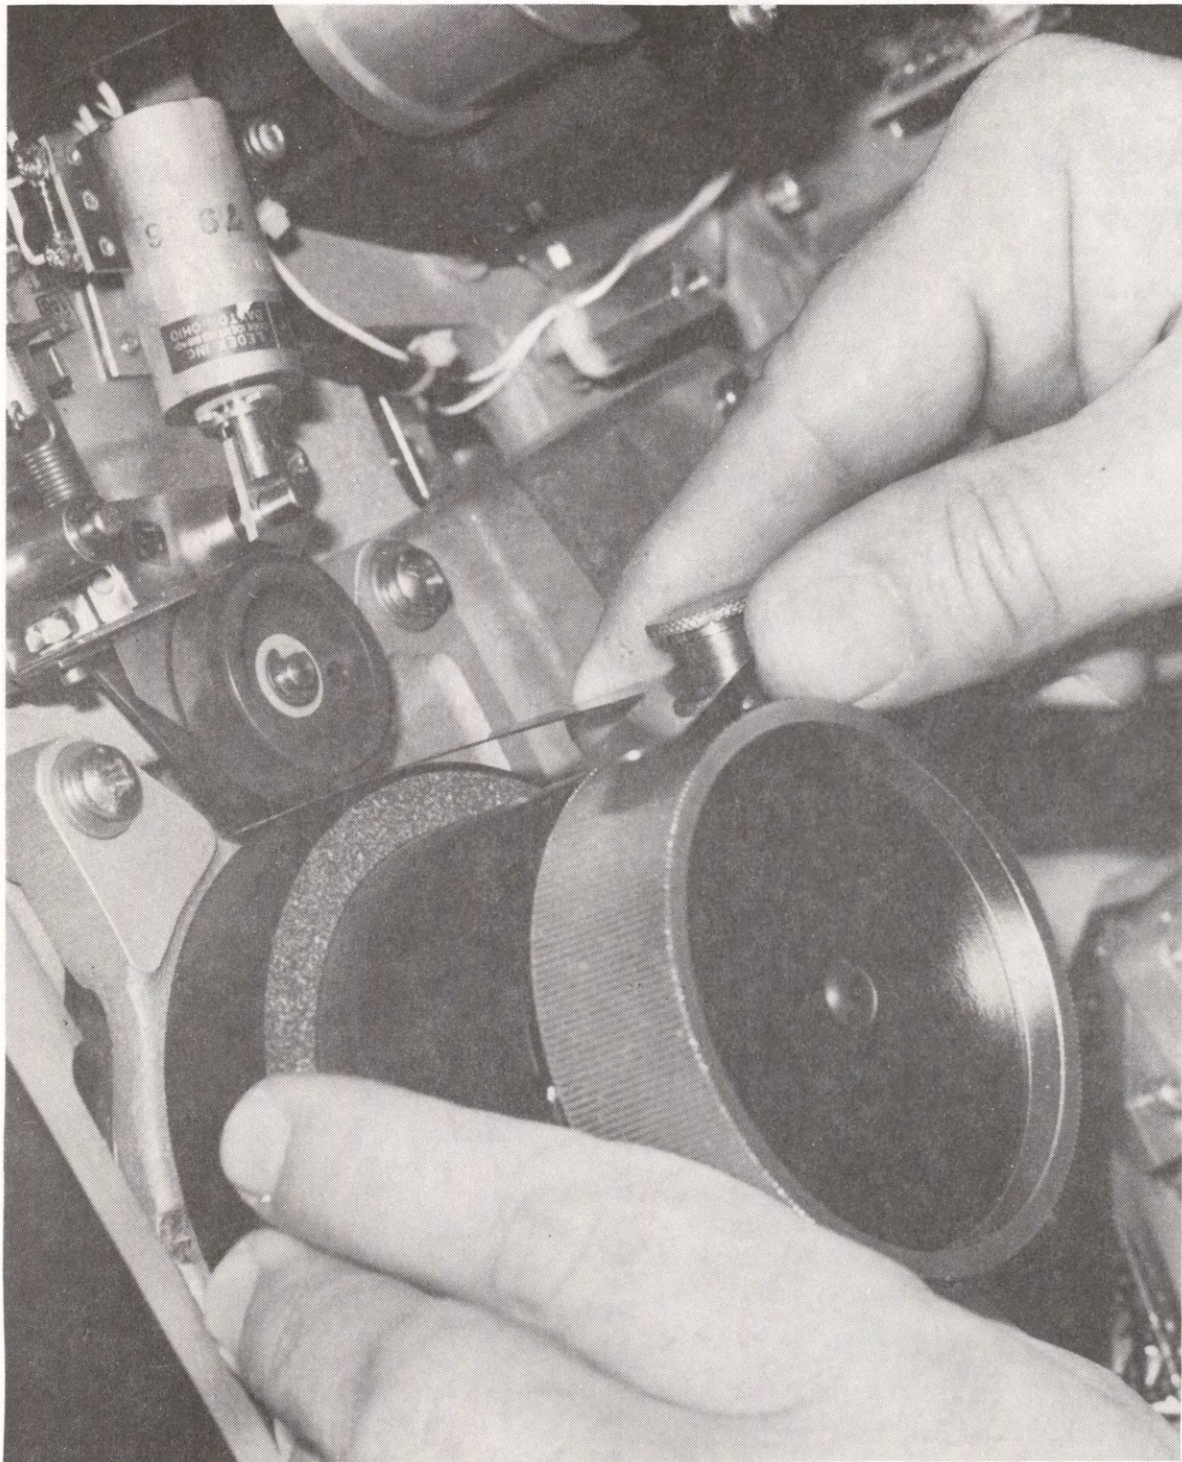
Check Clearance Between Supply Reel Turntable and Parking Brake Tire
